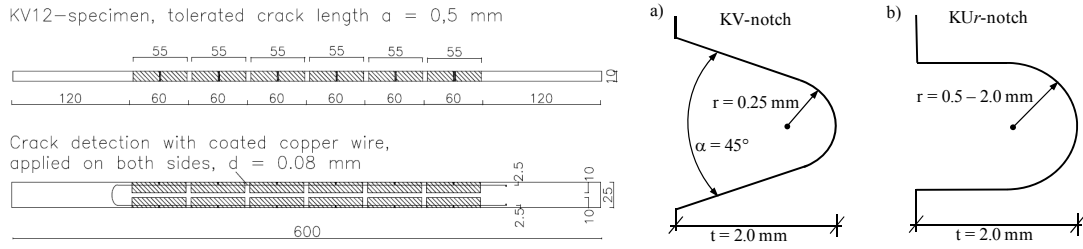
Fatigue testing specimen with 12 KV-notches (left); detail of notch geometry (right).
